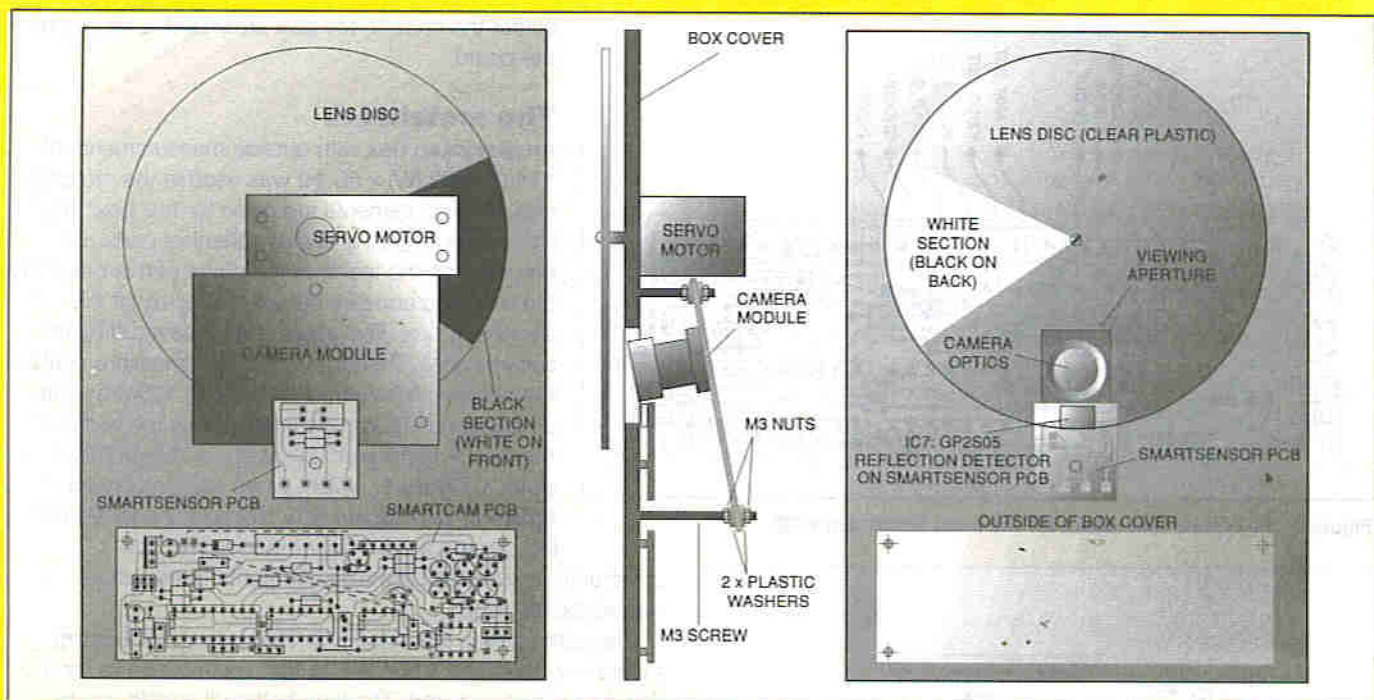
this diagram shows the relative positions of the PCBs, camera module and lens disc used in the prototype. Note that the reflection sensor, IC7, is positioned in the viewing aperture
